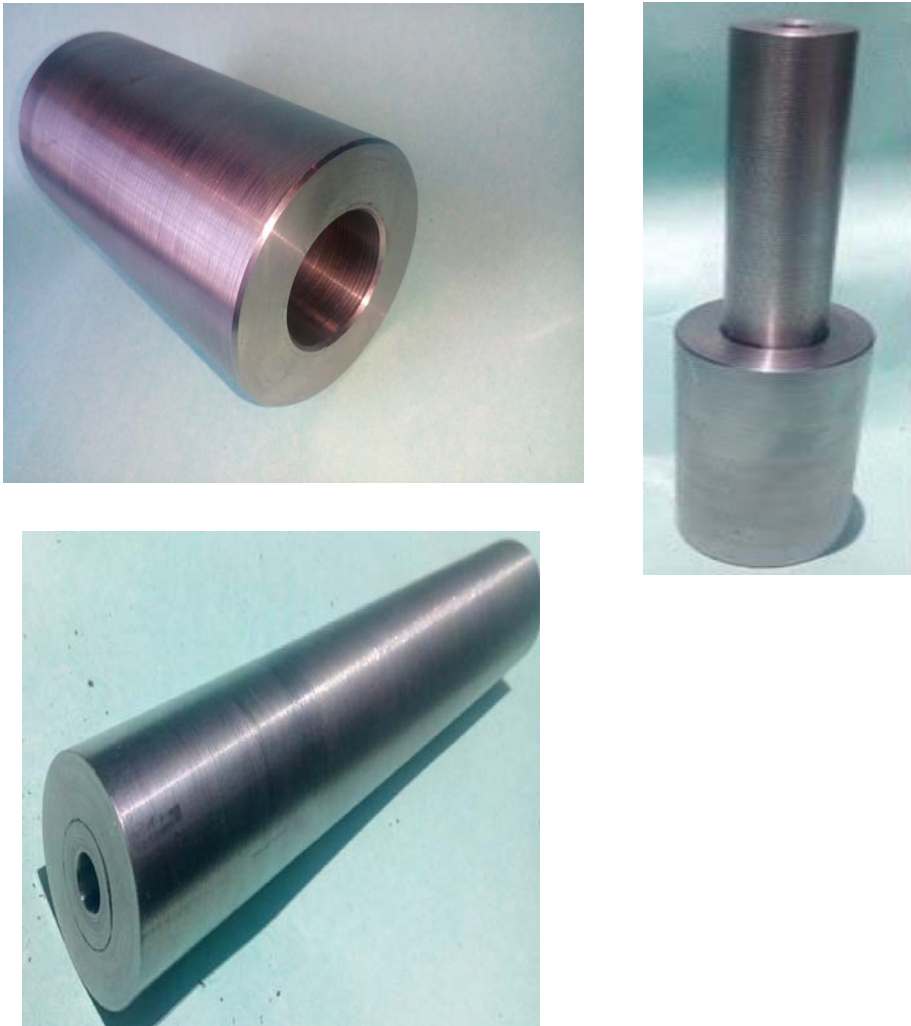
a.b.c. Cartridge & Plunger with inserted nozzle
